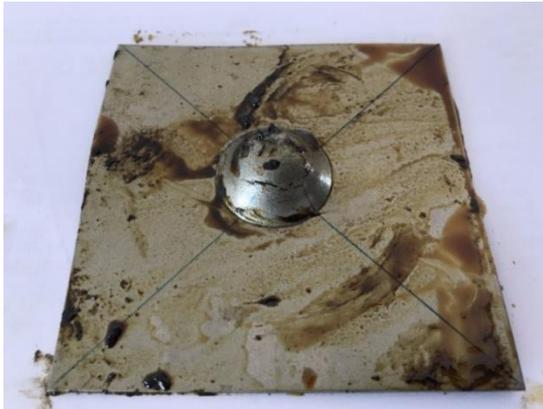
FRACTURE IN 1 mm THICKNESS SHEET- WET CONDITION
